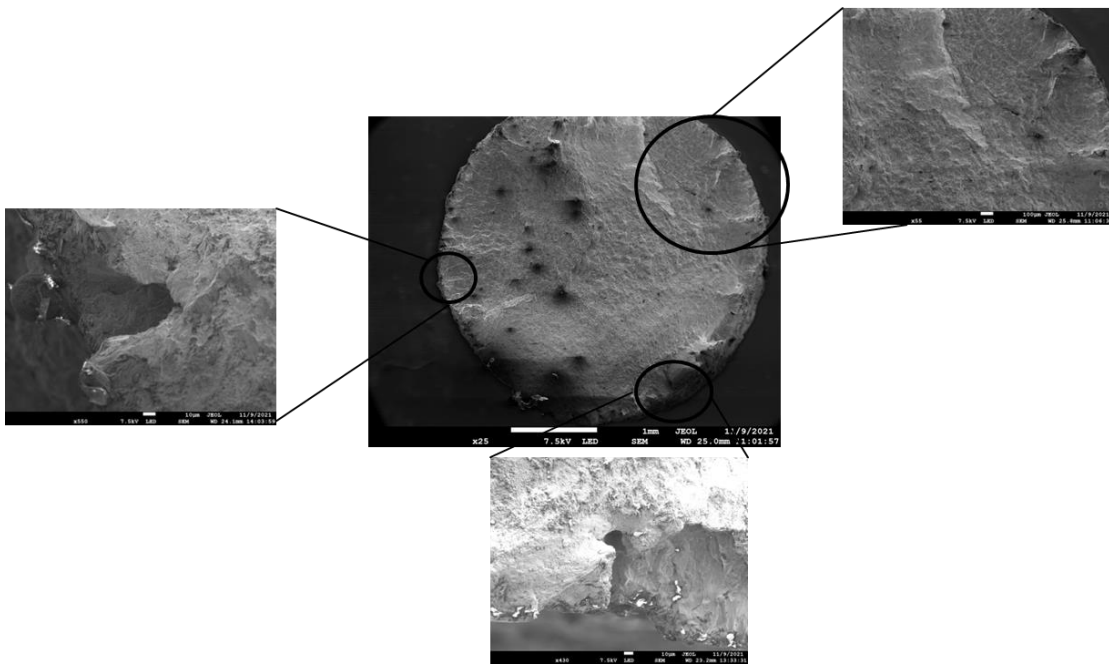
Fractography of fatigue sample 1 fabricated with 230 W
